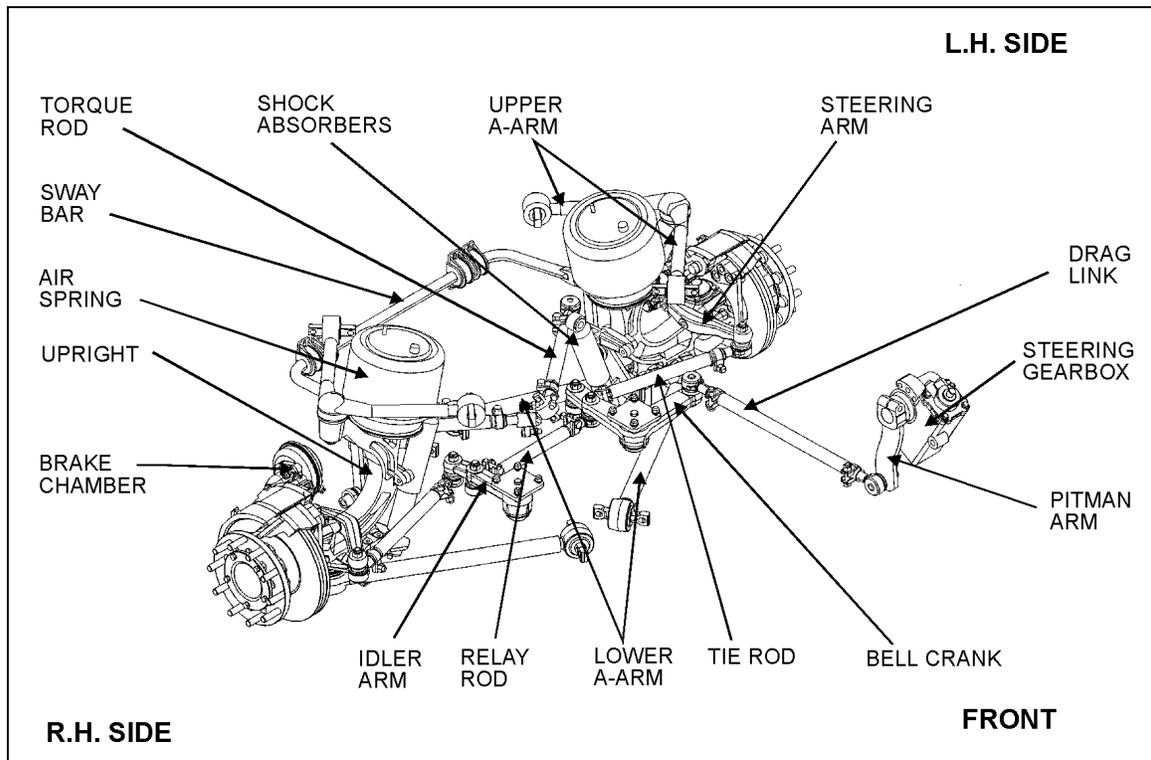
SUSPENSION AND STEERING LINKAGE
